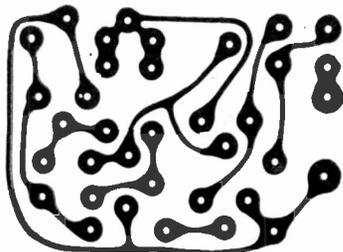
Actual-size printed circuit foil pattern used for the receiver.
